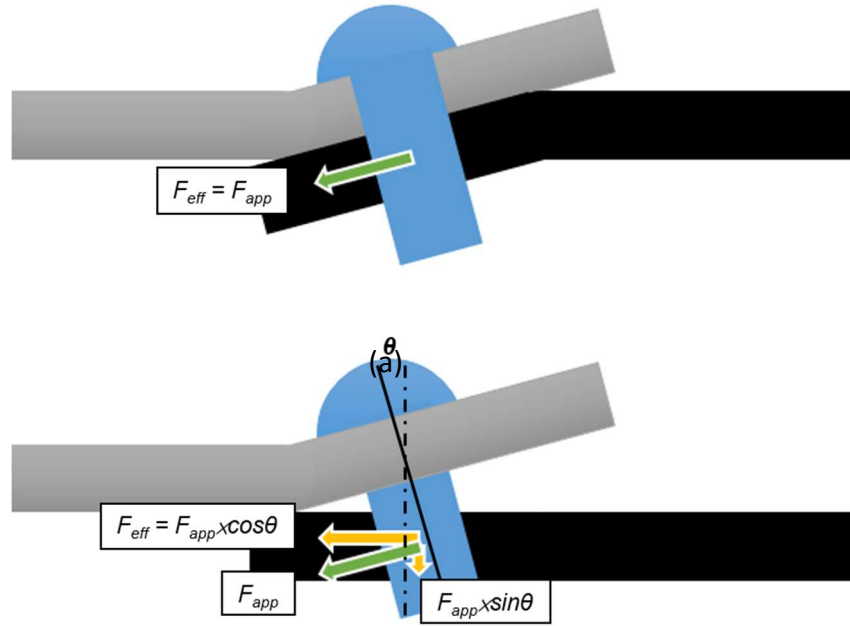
Figure B. Secondary bending of Mg/CFRP FSBR joint: (a) regular secondary bending; and (b) non-regular secondary bending (when rivet body rotates in CFRP workpiece).
